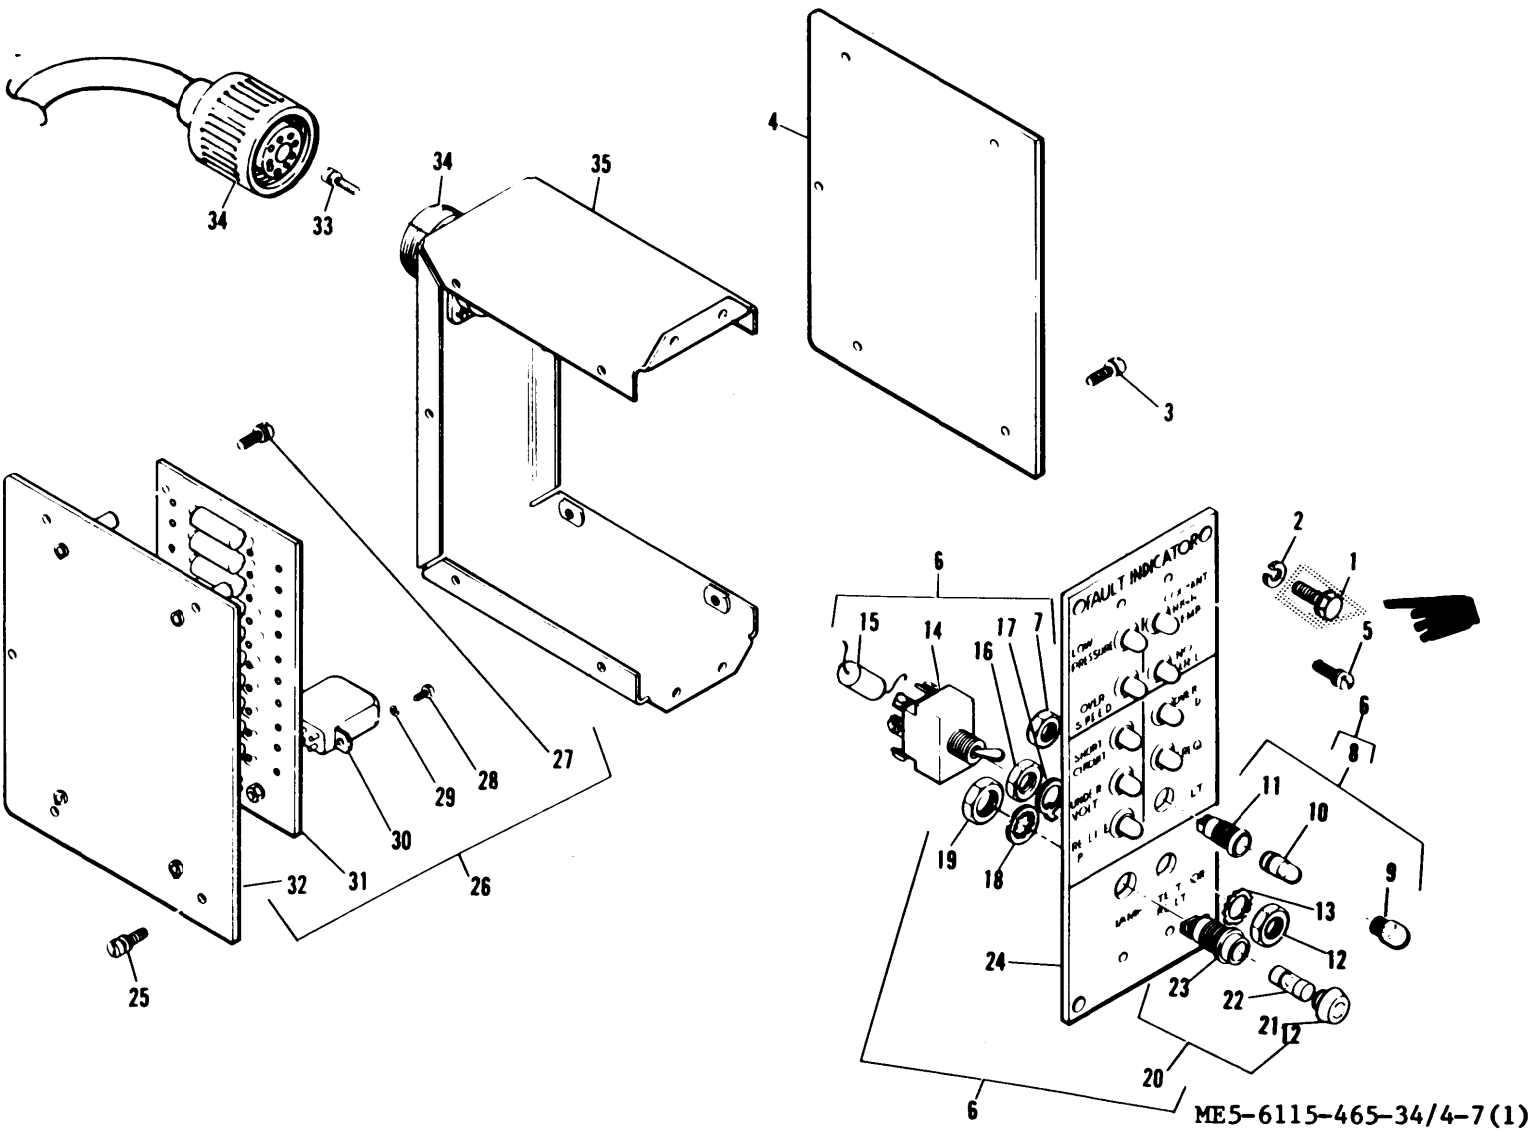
Fault Locating Indicator, Exploded View (Sheet 1 of 2)
